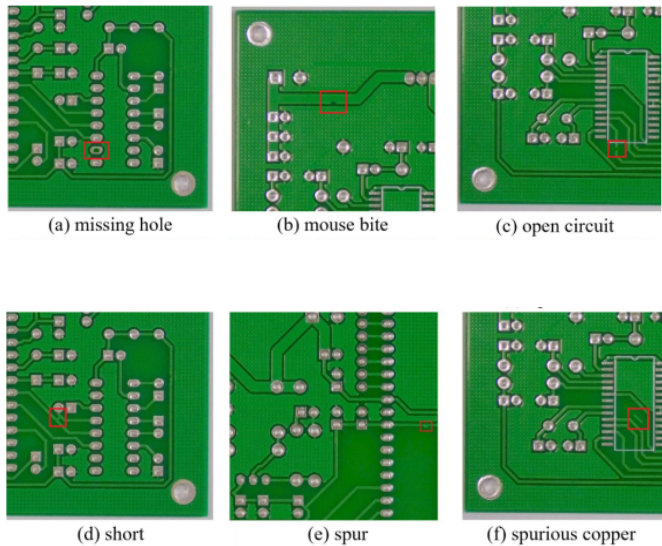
AI-Powered Defect Detection in PCB Inspection.
